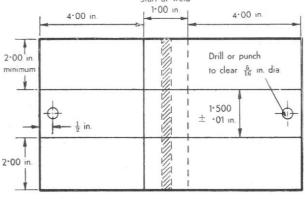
Dimensions for spot welding a tension-shear test piece.
